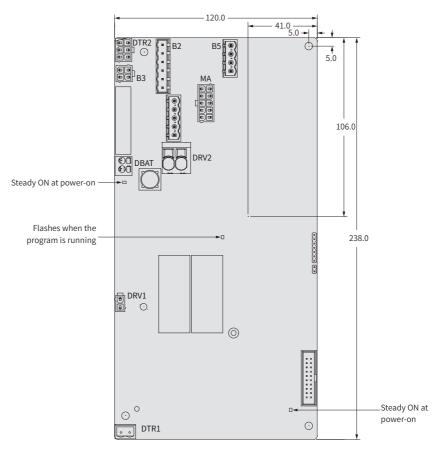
Outline and dimensions of the MCTC-PCB-N1 (unit: mm)
